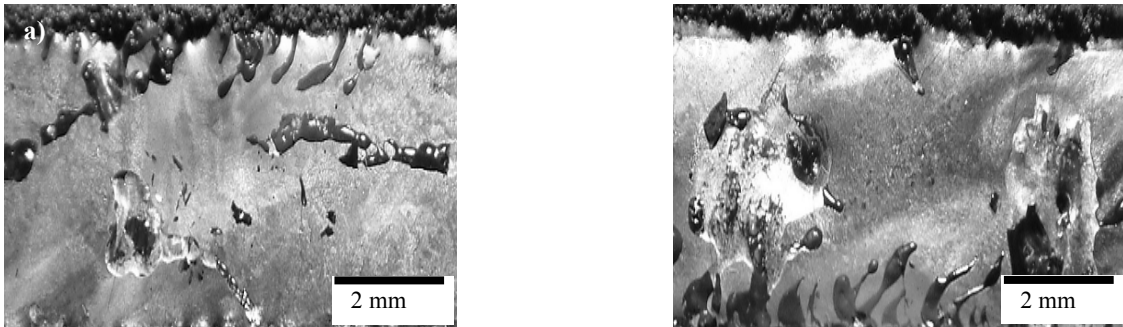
Surface structure of the laser path of the X40CrMoV5-1 steel after laser remelting with HPDL laser according to the process parameters: a) B3, b) B4, thickness of the put on WC paste coating 0.1 mm
